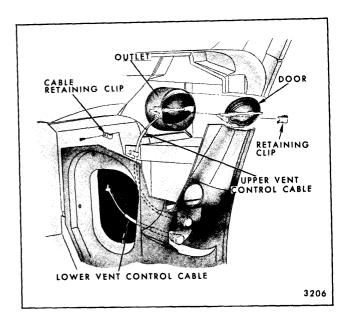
Shroud Center Duct Upper Air Outlet Door -"A & G" Styles
